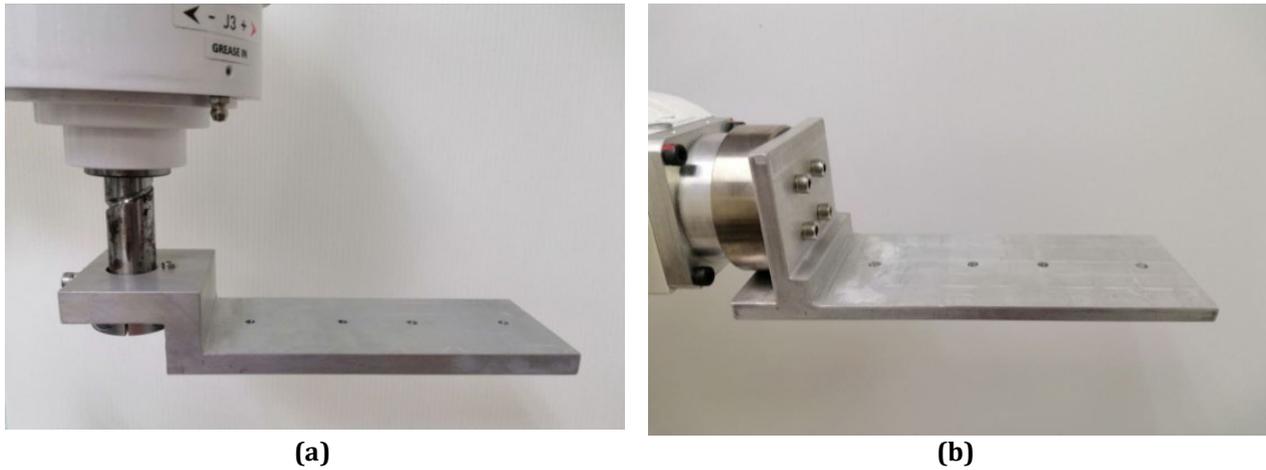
(a) SCARA platform holder; (b) Articulated robot arm platform holder
